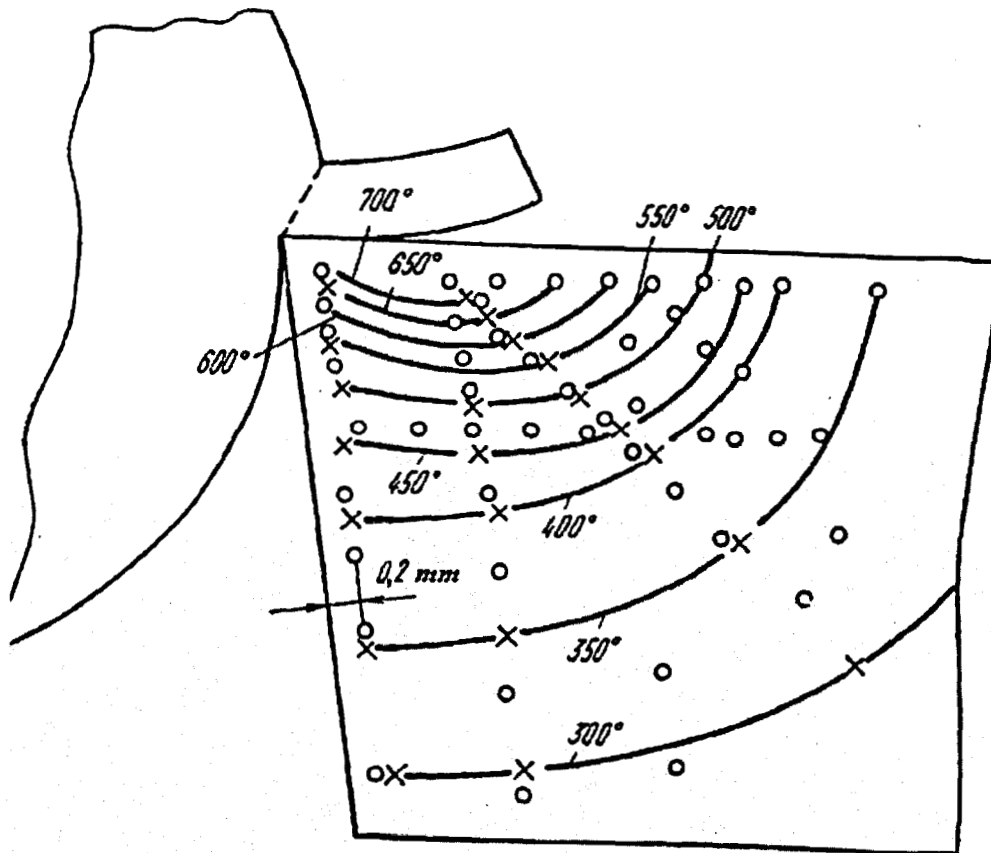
Temperature field of cutter for cutting steel. The cutter is made of WC15%TiC6%Co; depth of cut is $t=2.55$ mm; feed is 0.2 mm/rev.; and speed is $v=150$ m/min.
